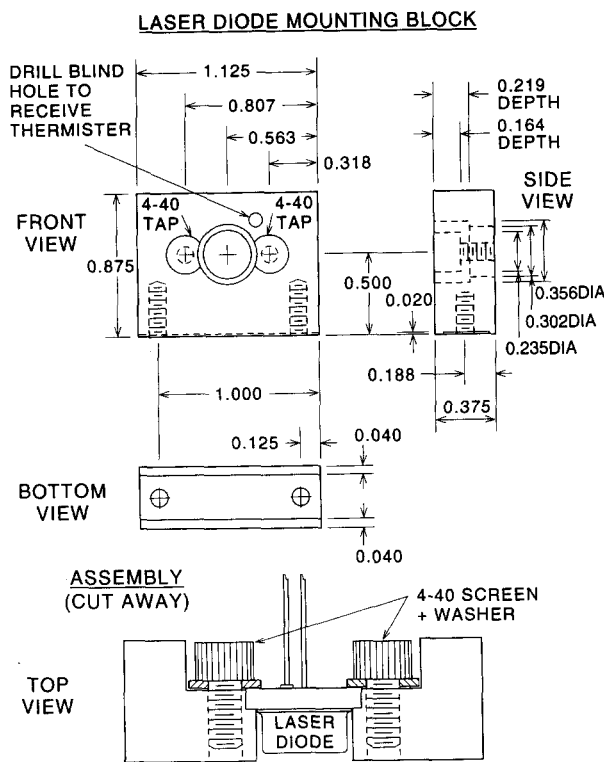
Laser mounting block, machine drawing. Dimensions are in inches. The hole sizes, spacings, and depths are correct for a Sharp LT025MDO laser and may be modified for other types.
